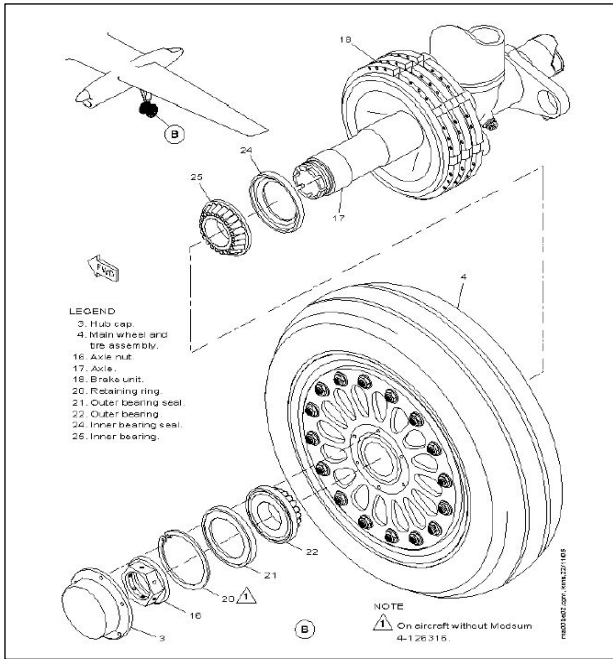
General arrangement of mainwheel and bearings on DHC8-402 aircraft
